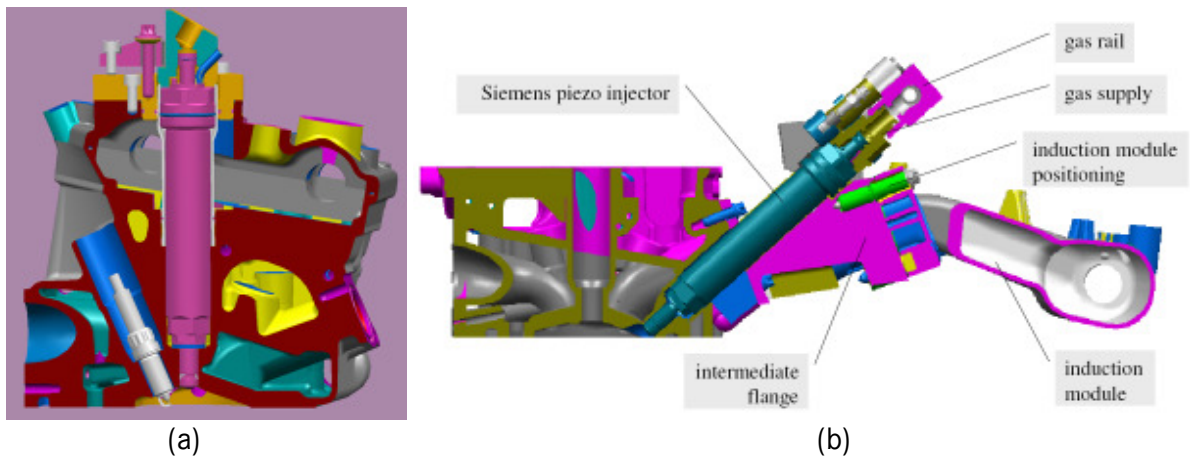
Single-cylinder engine concept with centrally mounted injector (a) and final multi-cylinder engine design (b)
